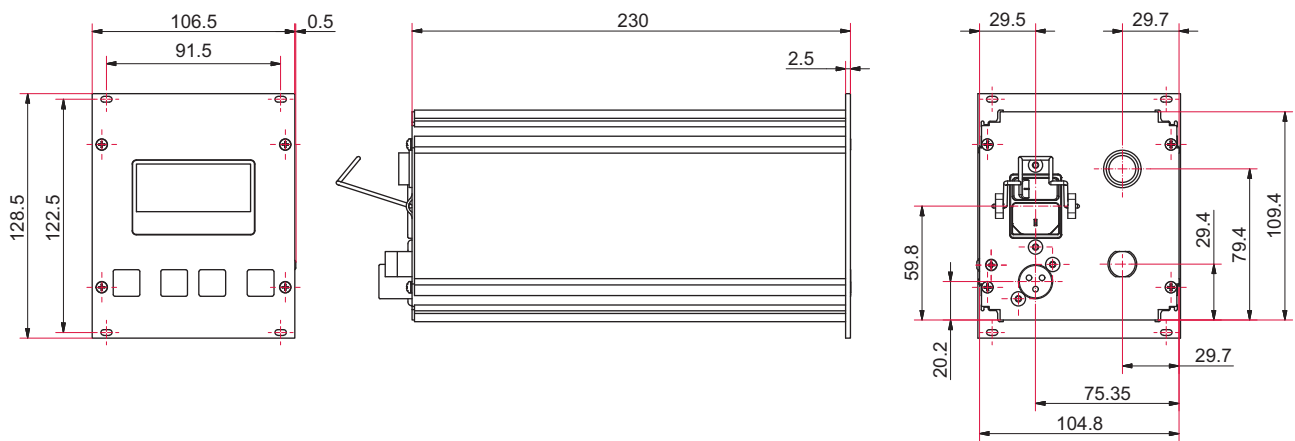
Dimensions DCU 180, DCU 310, DCU 400
